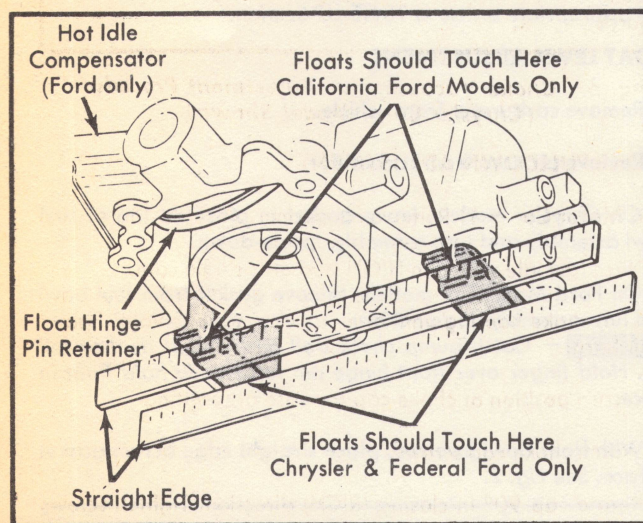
Using Straight Edge To Check Float Level (Ford Shown — Chrysler Similar)
